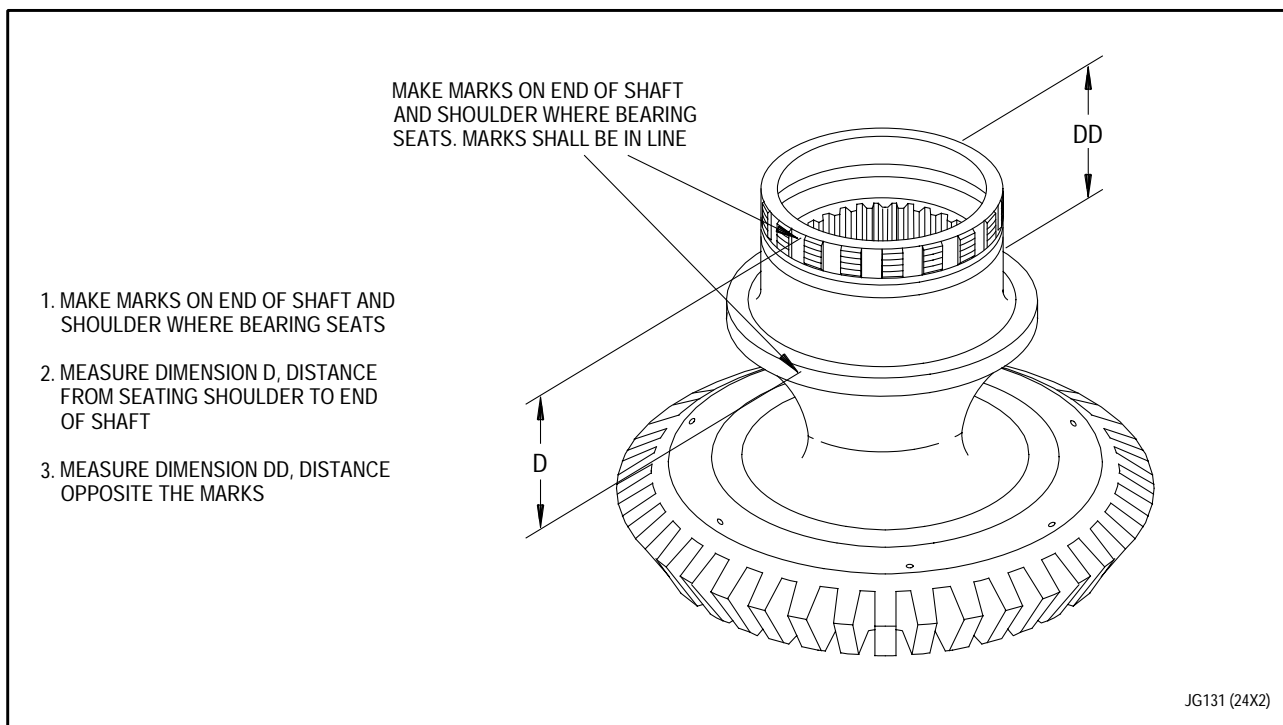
Gearbox Drive Bevel Gearshaft - Measurement
